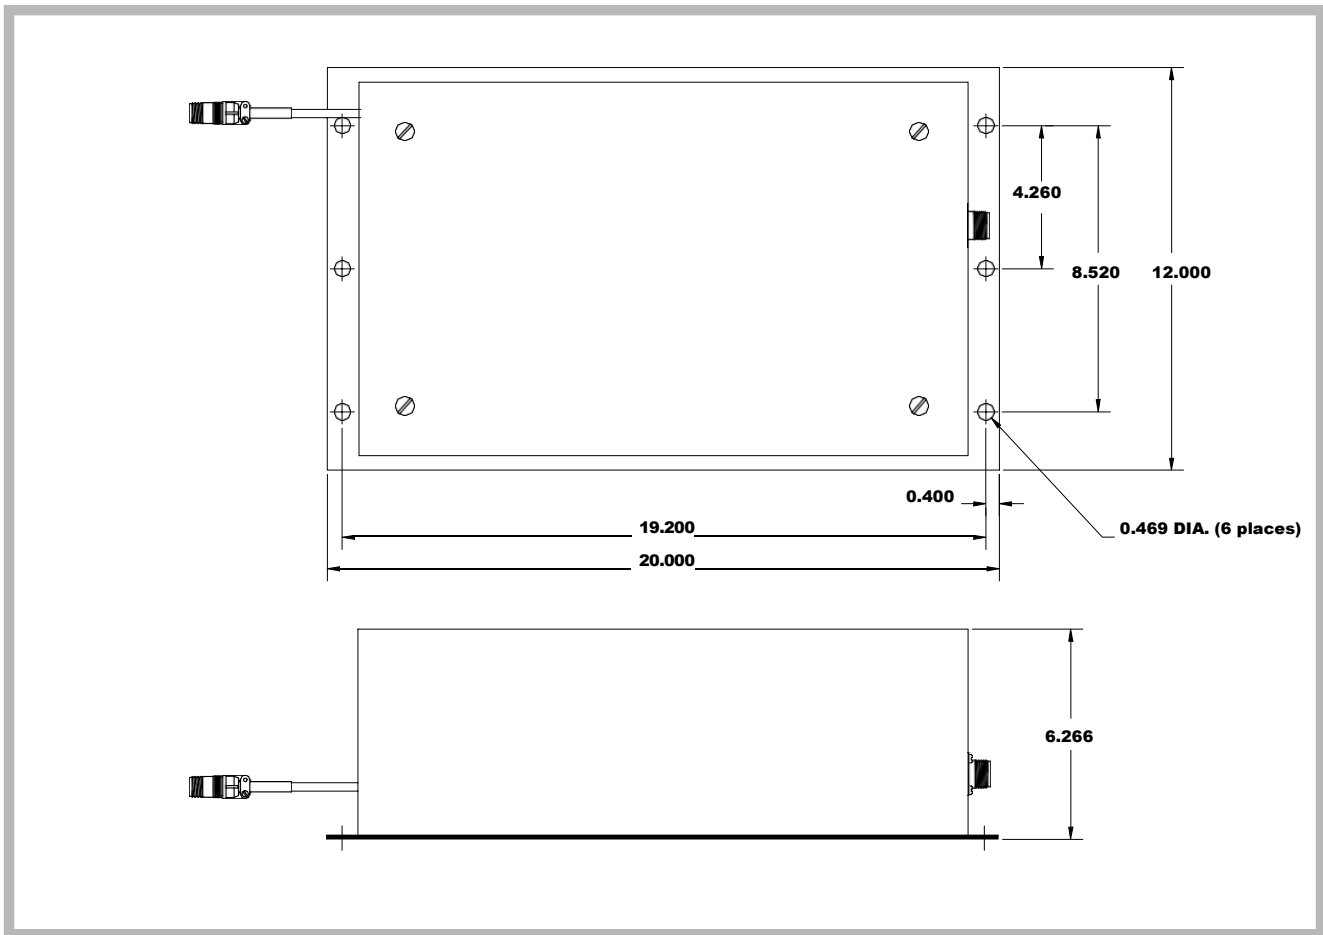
THE EXTENSION REEL ASSEMBLY – BLR-783C
